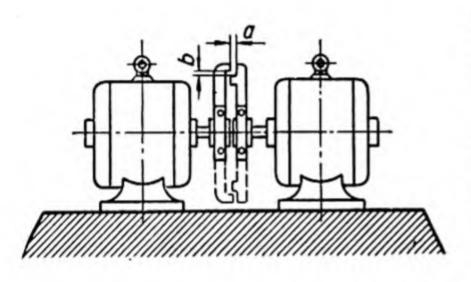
Aligning of a rigidly coupled two-machine unit.
